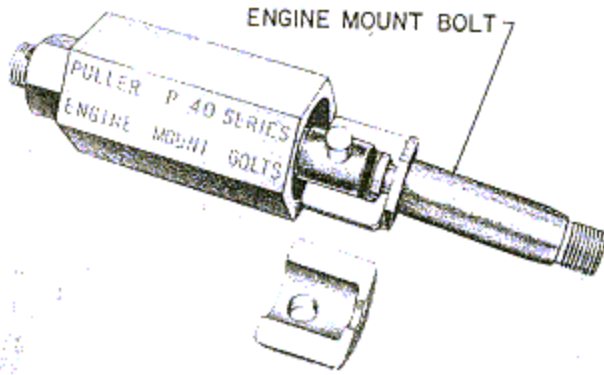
Engine Mount Bolt Puller Assembly Showing Bolt Engaged in Clamp
